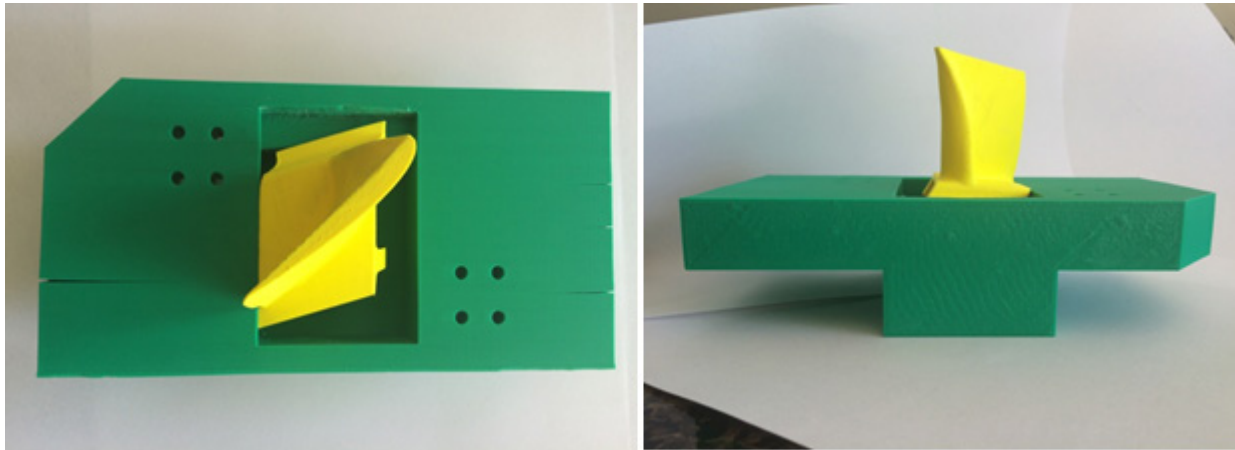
Top and front view of a prototype fixture with a 3-D printed blade. Internal fixture geometry ensures correct orientation of the blade.
